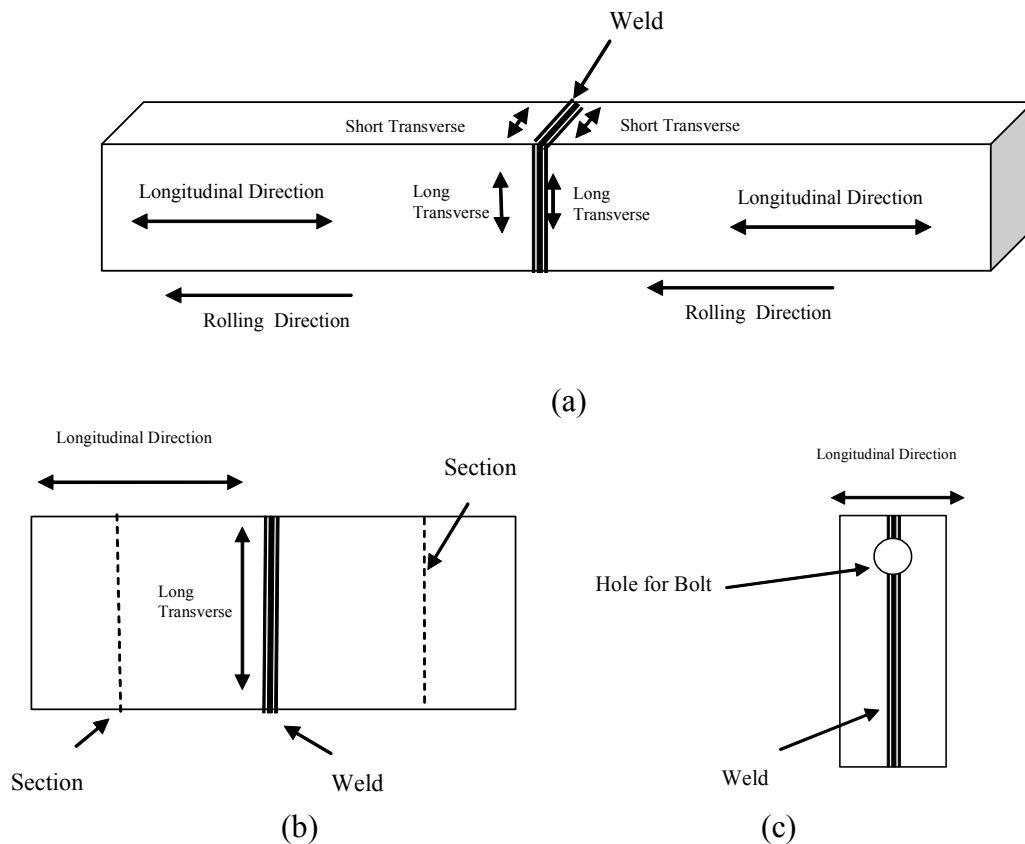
(a) Schematic of the two welded plates from mill sheet, (b) schematic of the weld and the orientation for the U-bend specimen, (c) side view of the final U-bend specimen after bent around a mandrel [11,15].
